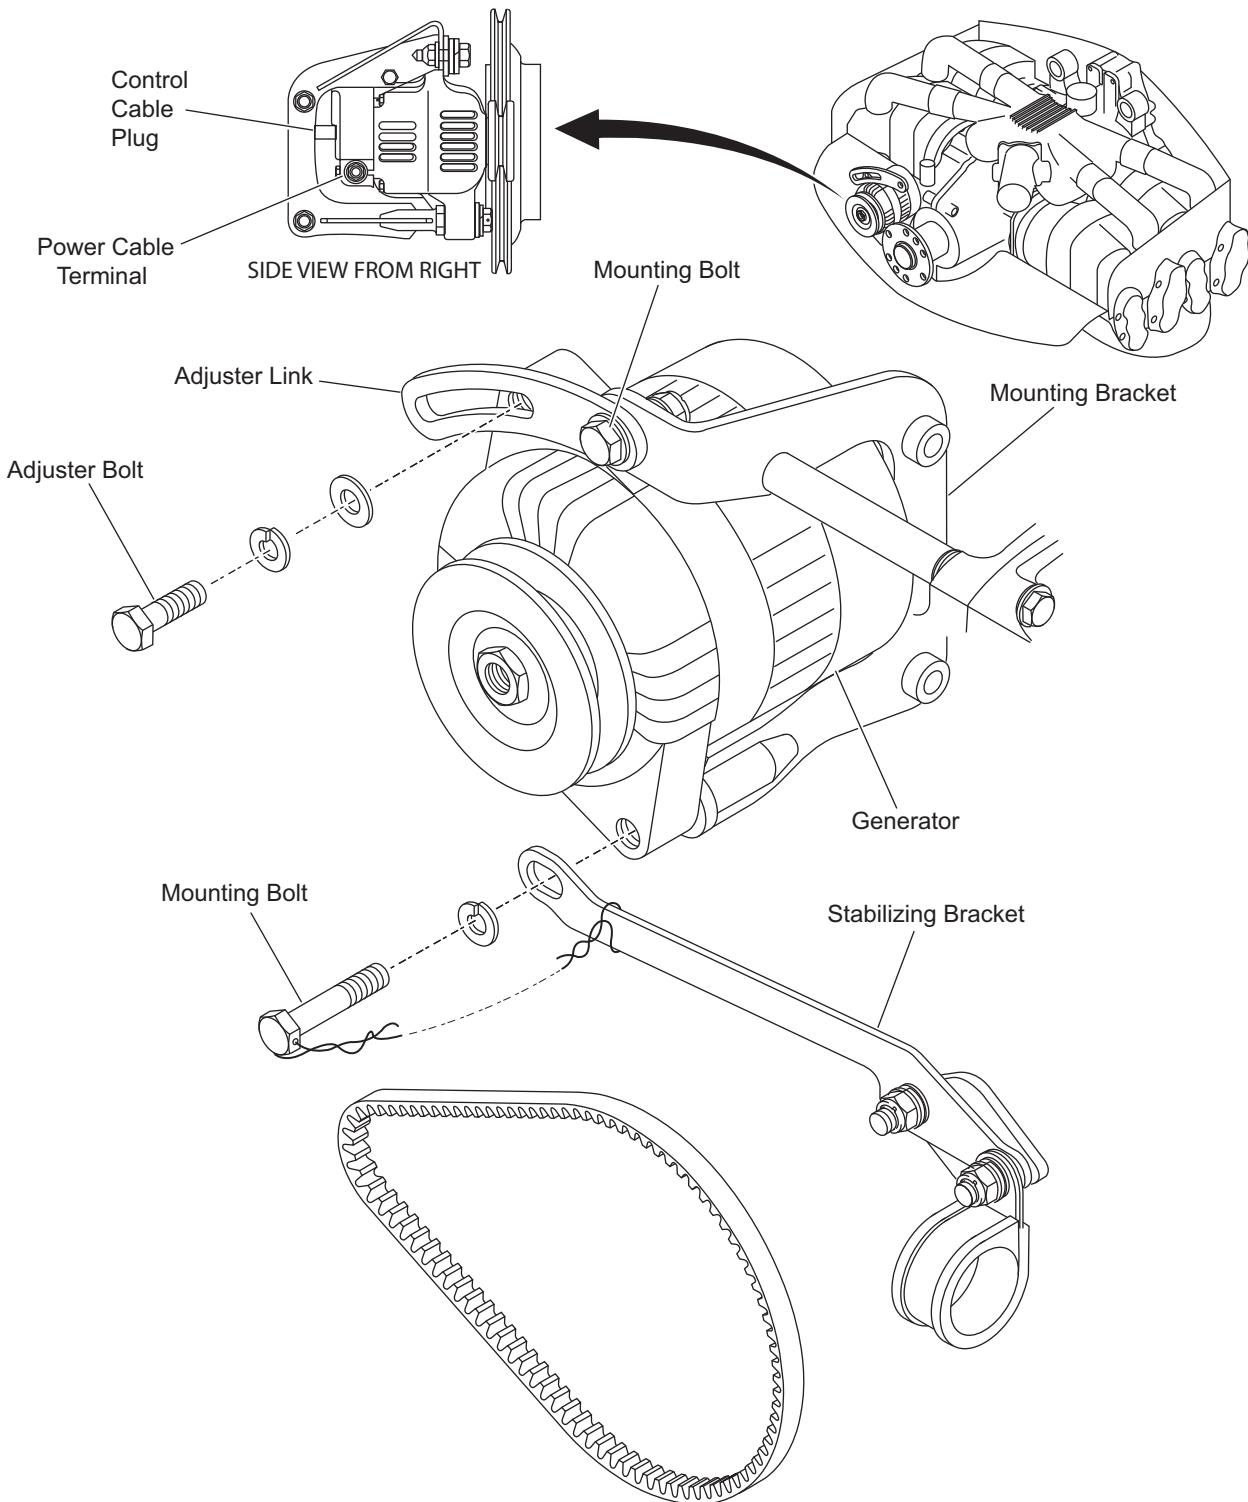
Generator/Alternator Removal and Installation (Sheet 1 of 2)
